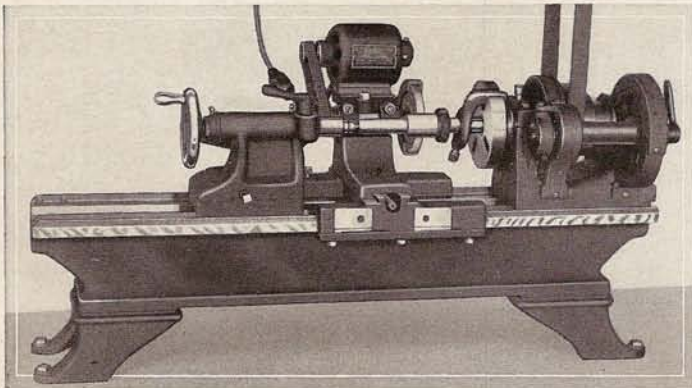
Grinding a Hardened Steel Bushing to Exact Diameter on a 9-inch Junior Lathe Equipped with an Electric Grinding Attachment
